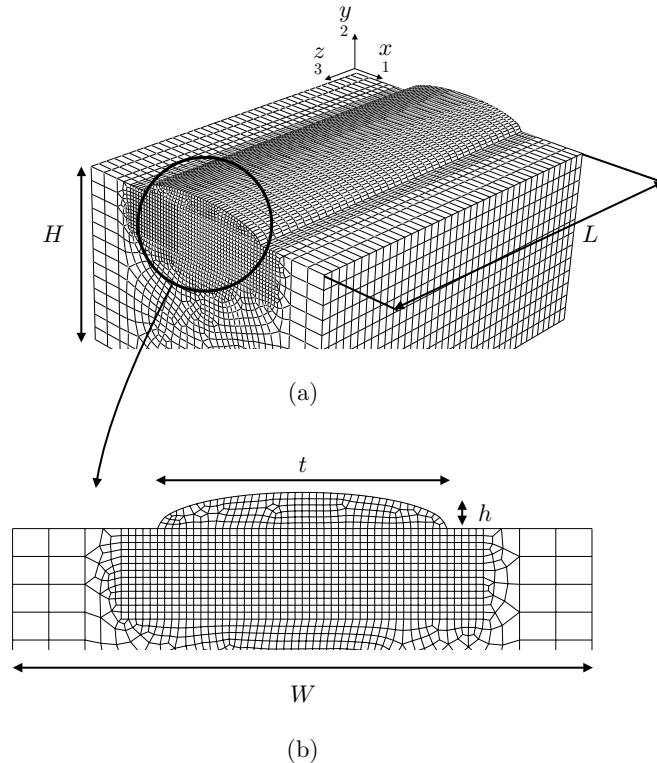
Finite element mesh and dimensions. (a) Overall view with orientation tryad ; and (b) weld bead
